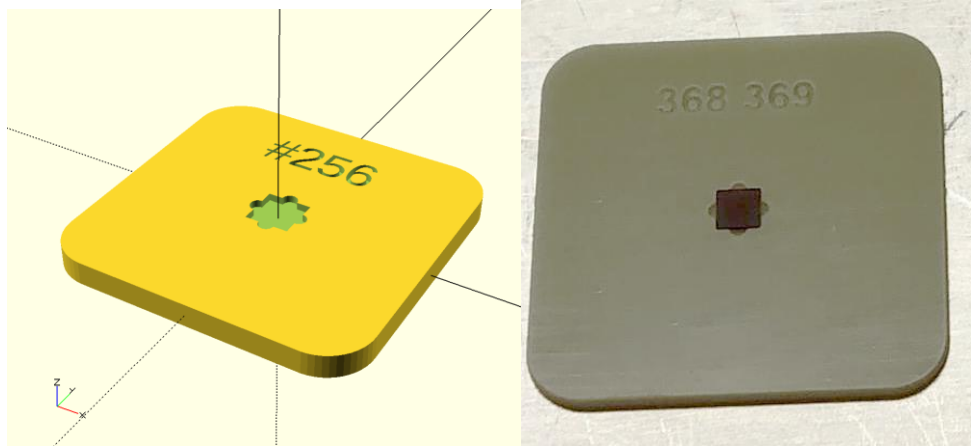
(left) Sample holder generated in the OpenSCAD by the parametric generated code based on the sample dimensions (right) 3D printed sample holder with diamond sample ($2.9 \times 2.9 \times 0.5 \text{ mm}^3$) inserted in the well-fitting socket
